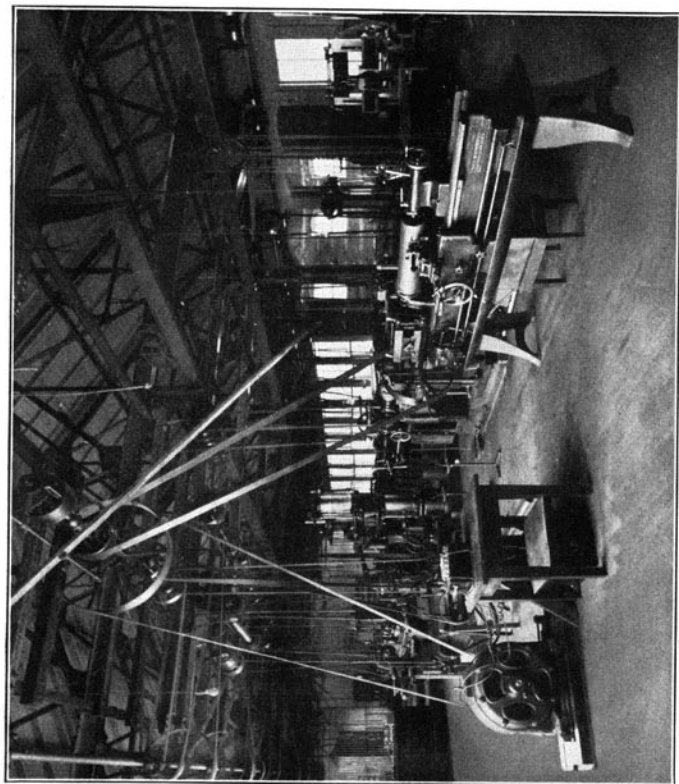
VIEW IN THE UNIVERSITY OF ILLINOIS MACHINE SHOP SHOWING LOCATION OF LATHE AND MOTOR DRIVE USED IN TESTS WITH HIGH-SPEED TOOL STEELS
